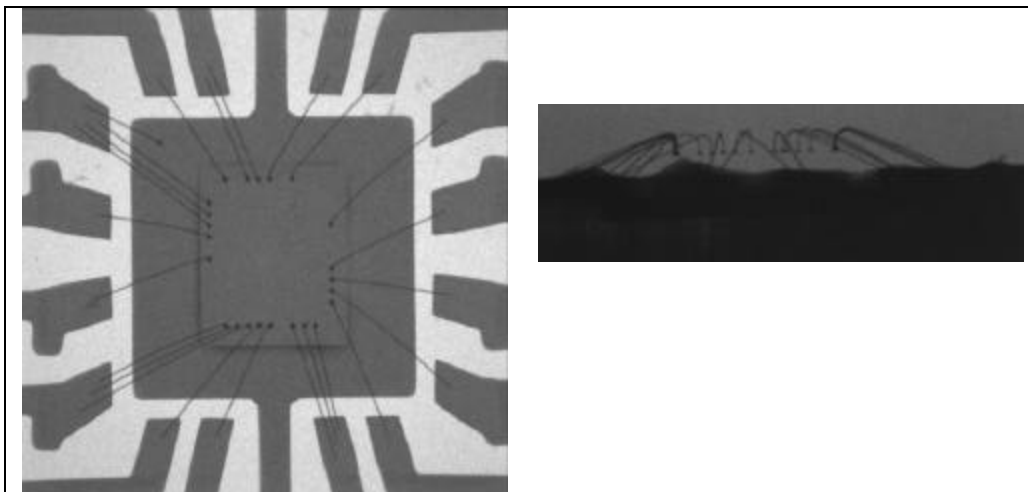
Typical top and side radiographic views of the part showing adequate lead frame design, wire dressing and layout.
